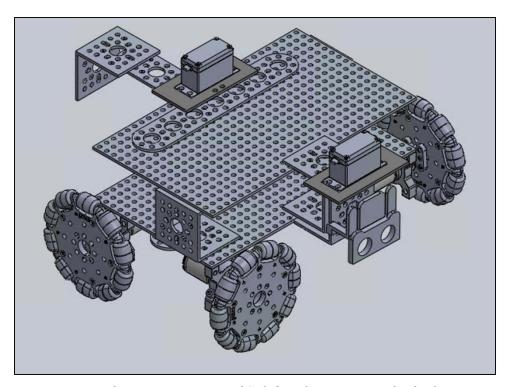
Isometric view of Solidworks Drawing of vehicle.
